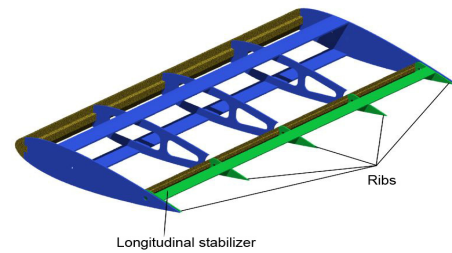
Longitudinal stabilizers; - ribs Construction of elevator rudder
